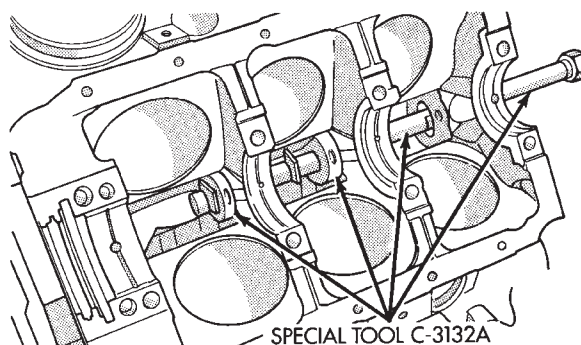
Camshaft Bearings Removal and Installation with Tool C-3132-A
